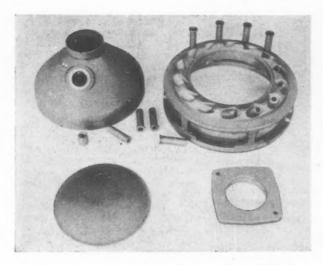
A View of the Stainless-steel Components [for the Assembly in Fig. 4
